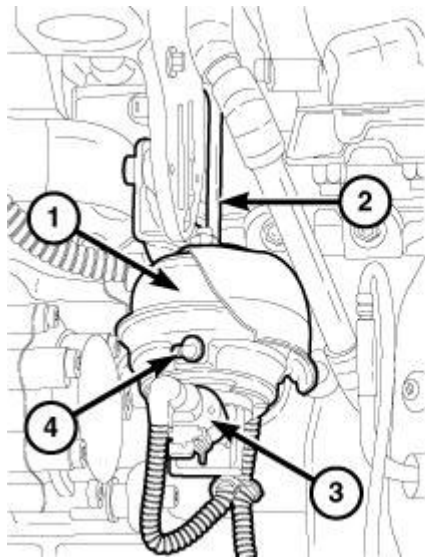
Clamp, Turbocharger & Two Attaching Bolts
